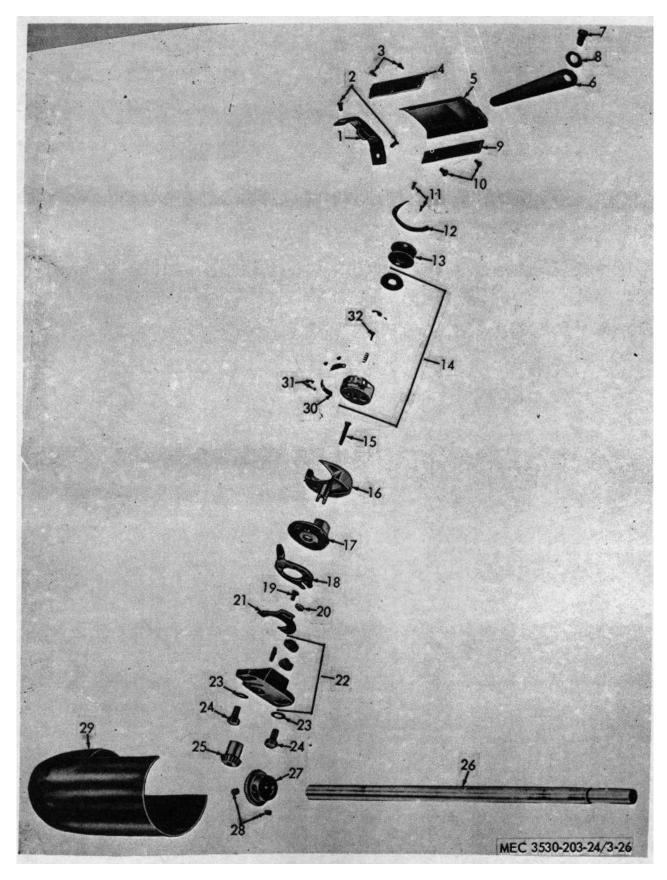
Darning machine thread hook, drive shaft, saddle, and bobbin case.
